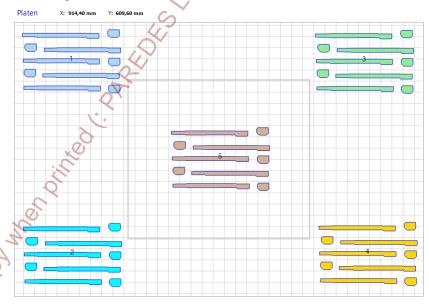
Print Job configurtion FLM material using larger qualified machines
